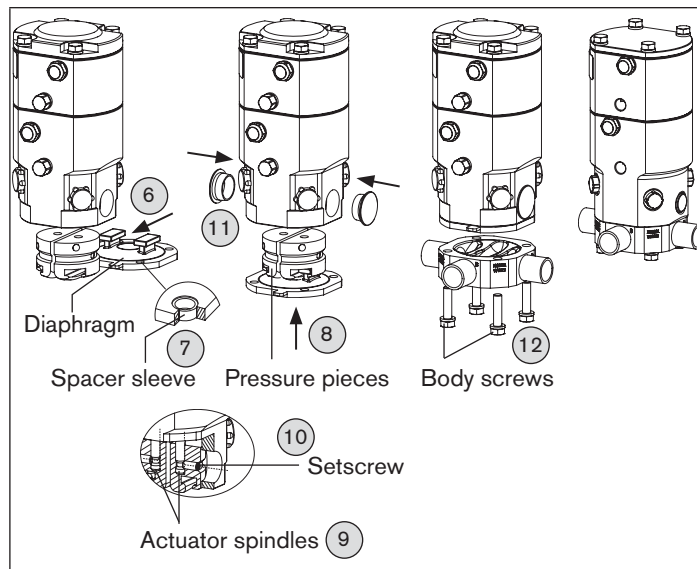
Assembly of the RV50, RV70 pneumatic actuators
